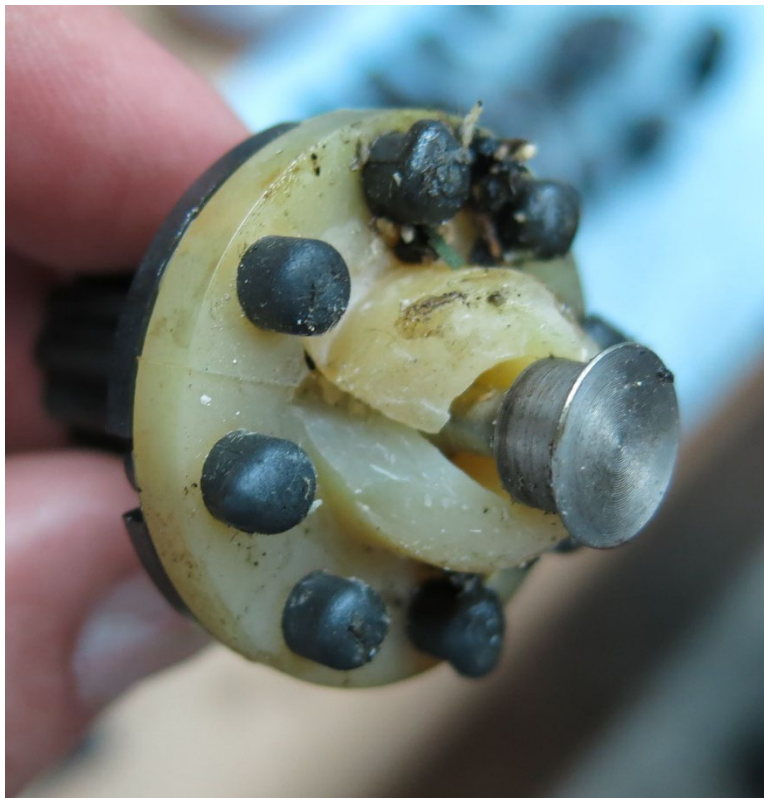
Aft side of vacuum pump with fragmented drive coupling.
